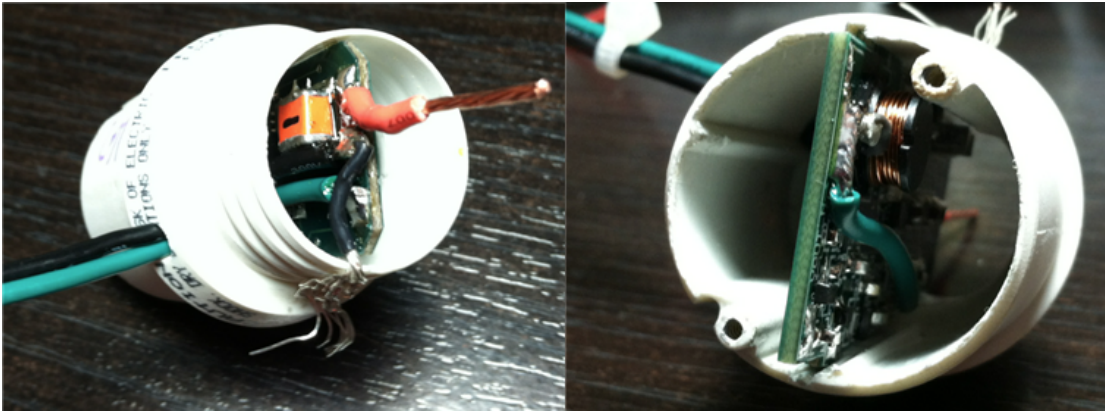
Fully Populated PCB Fitted Into Light Bulb's Inner Sleeve, Bottom (left) and Top (right) View.
